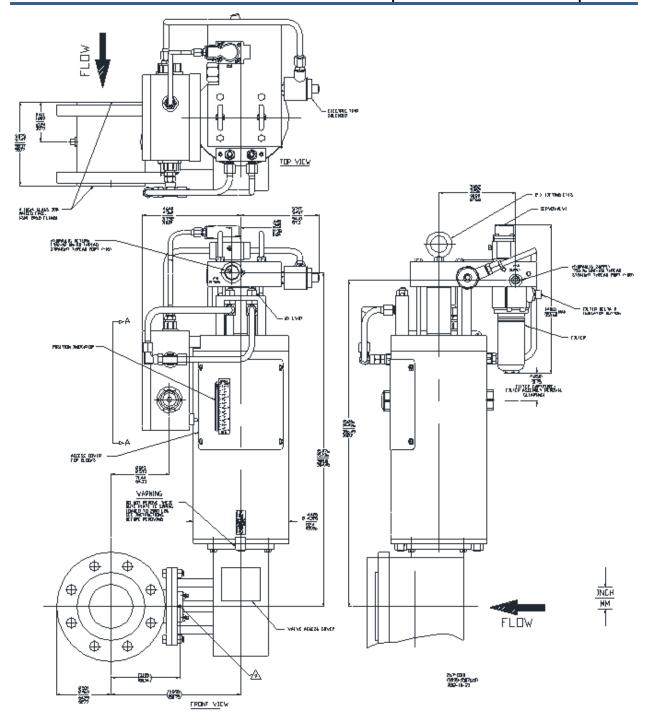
4" Electrical Trip Gas Stop/Ratio Valve Outline Drawing (dual conduit entry)
